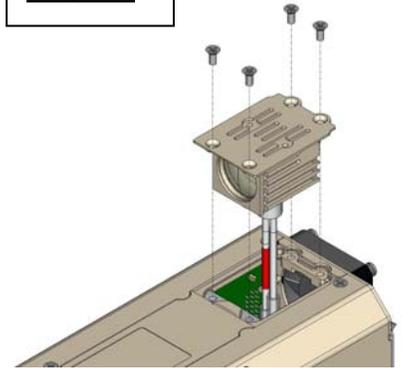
Fully seat lamp module into unit lamp pocket. Fasten and torque flat head screws until snug.
